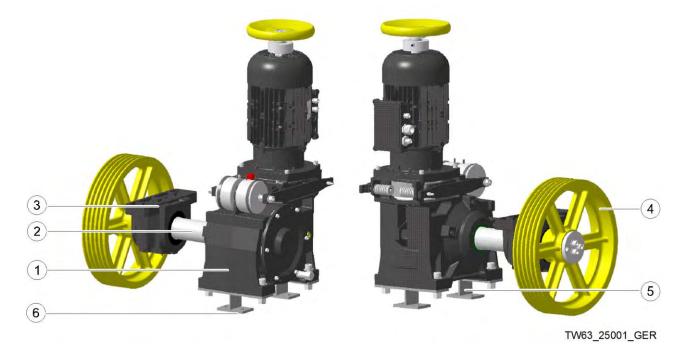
TW63B machine for version with traction sheave position in the shaft (shown: vertical motor position)
